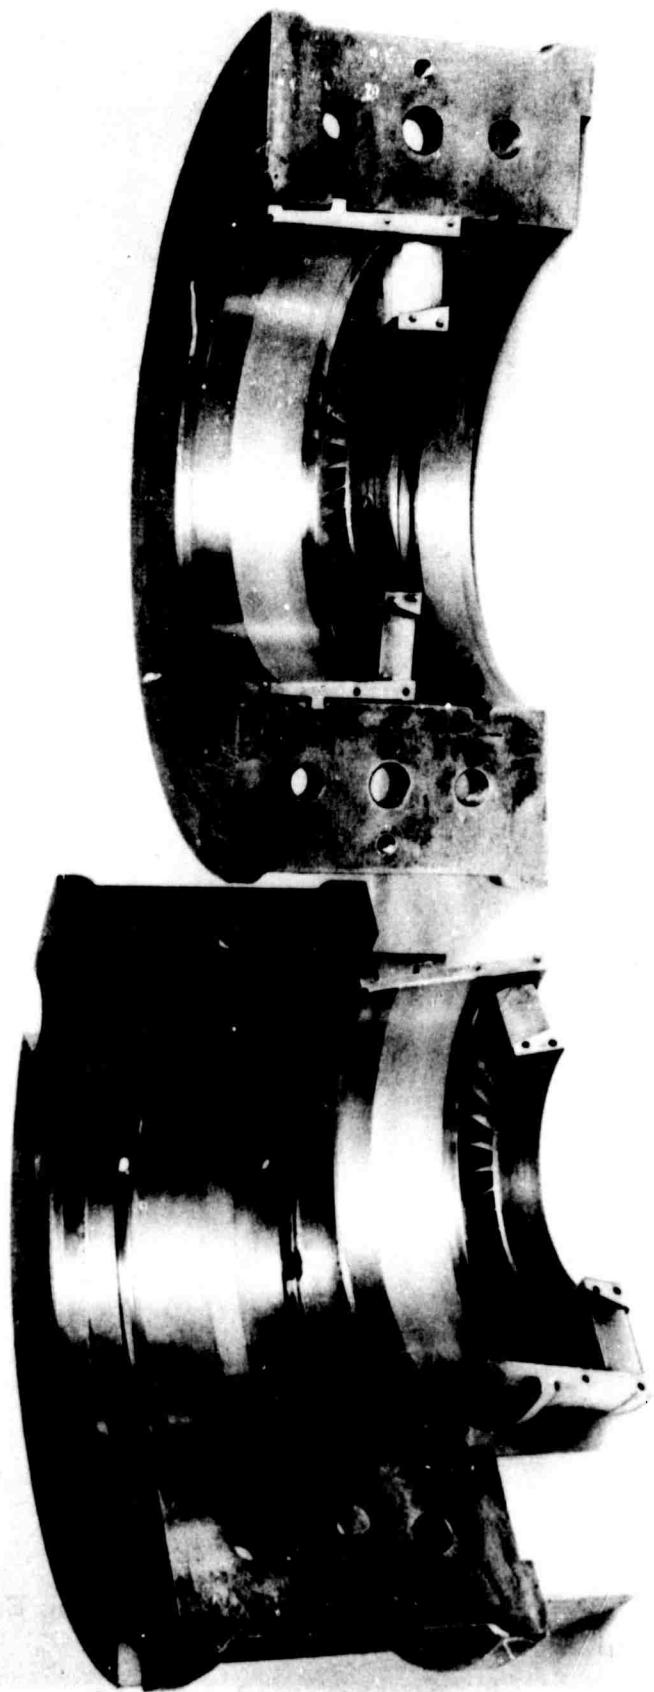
Redesigned First-Stage Stator and Compressor Housings.
